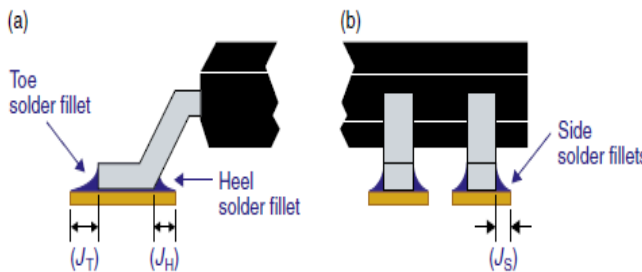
SMD padstack requirements: (a) sideview, (b) toe view.
